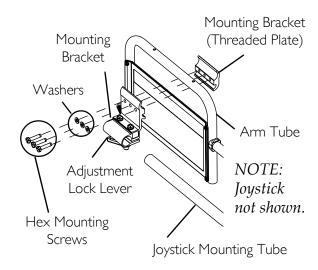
Repositioning Joystick - Adjustable ASBA Seats
